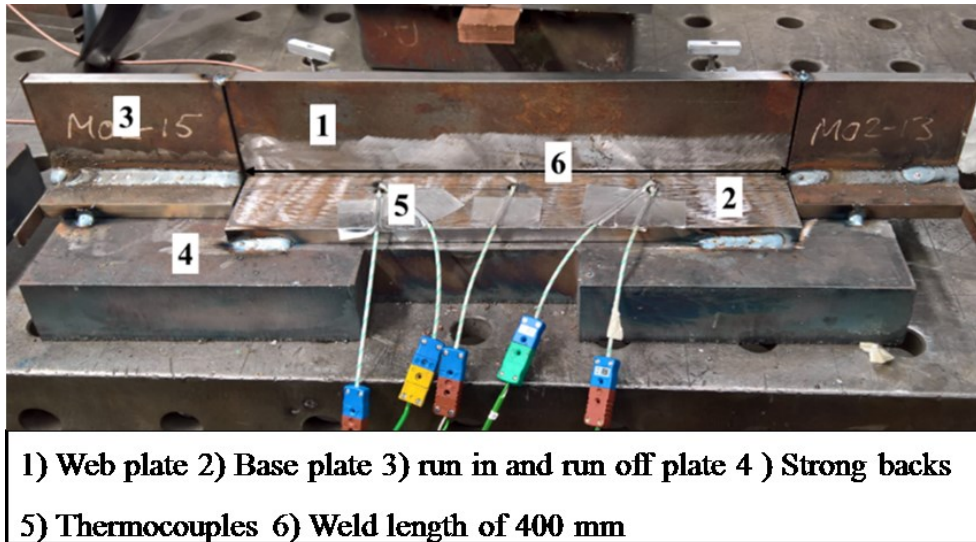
Photograph showing the welding set-up used for manufacturing the fillet welded plate with the long weld.
